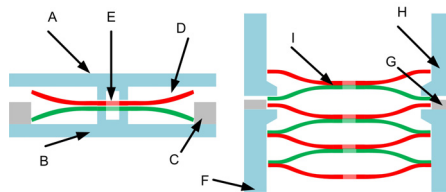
(A) upper welding electrode, (B) lower welding electrode, (C) centering coil, (D) two foil pieces, (E) hole for air passage, (F) lower welding electrode with undercut, (G) centering coil, (H) upper welding electrode with undercut, (I) foil segments from first step
